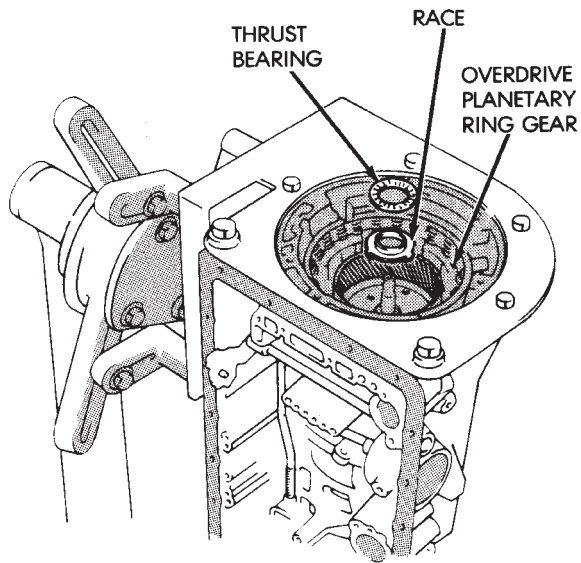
Removing Bearing, Race And Planetary Ring Gear
